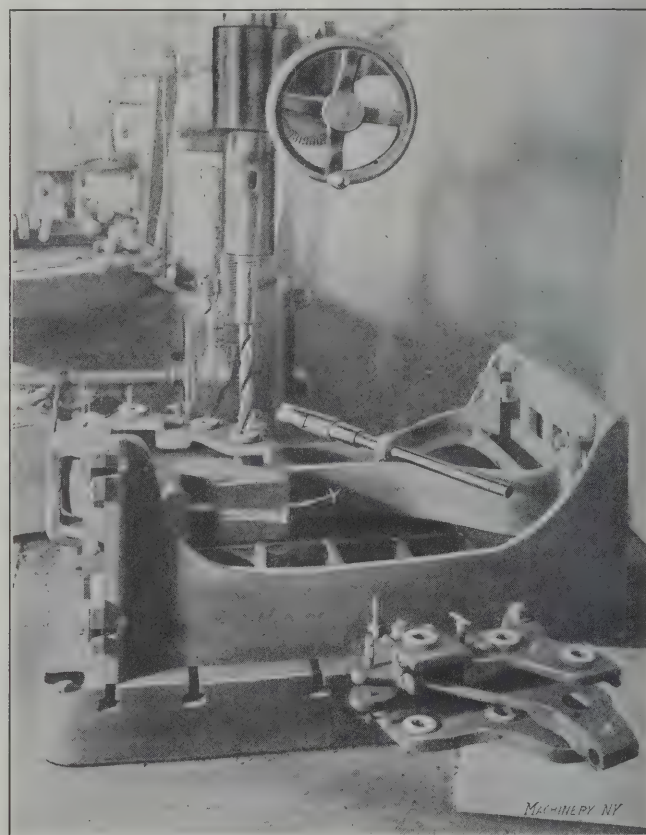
Drilling, Reaming and Counterboring the Bearings for the Gears
